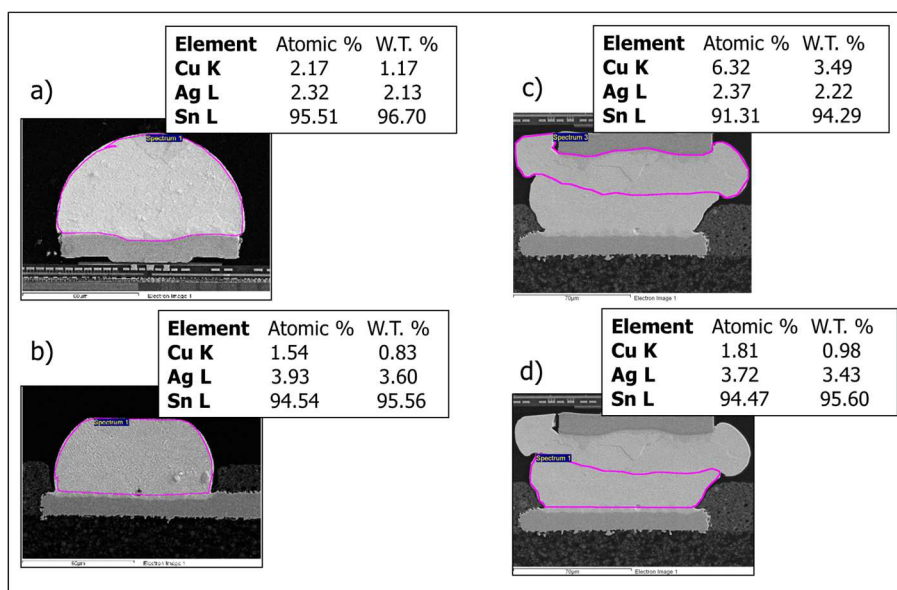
SEM and EDS analysis: a) pre-assembled Sn-1.4%Ag solder bump images (bump denote the solder deposited on the top side of the die), b) pre-assembled SAC 305 solder pad (Pad denote the solder on the substrate side to which the solder bump will be joined) , c) upper joint zone d) lower joint zone.
